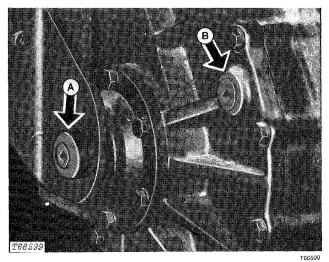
Track Gearbox Check oil level of both track gearboxes. Remove the check plug (A).
